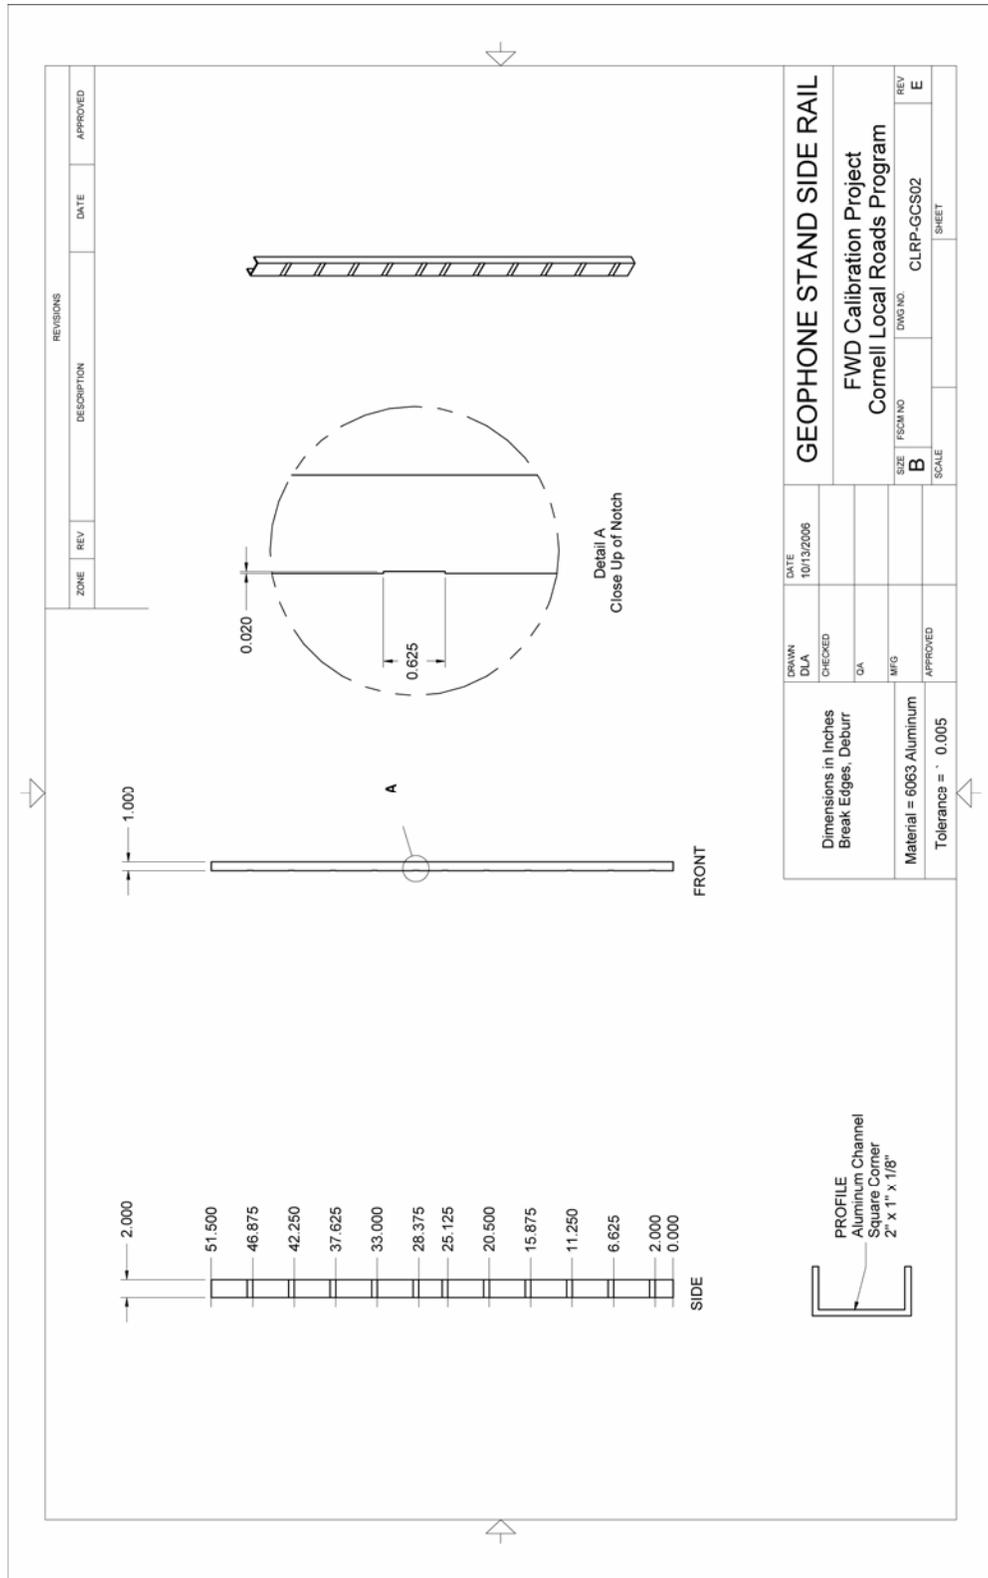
Drawing. CLRP-GCS02 Geophone Stand Side Rail.
